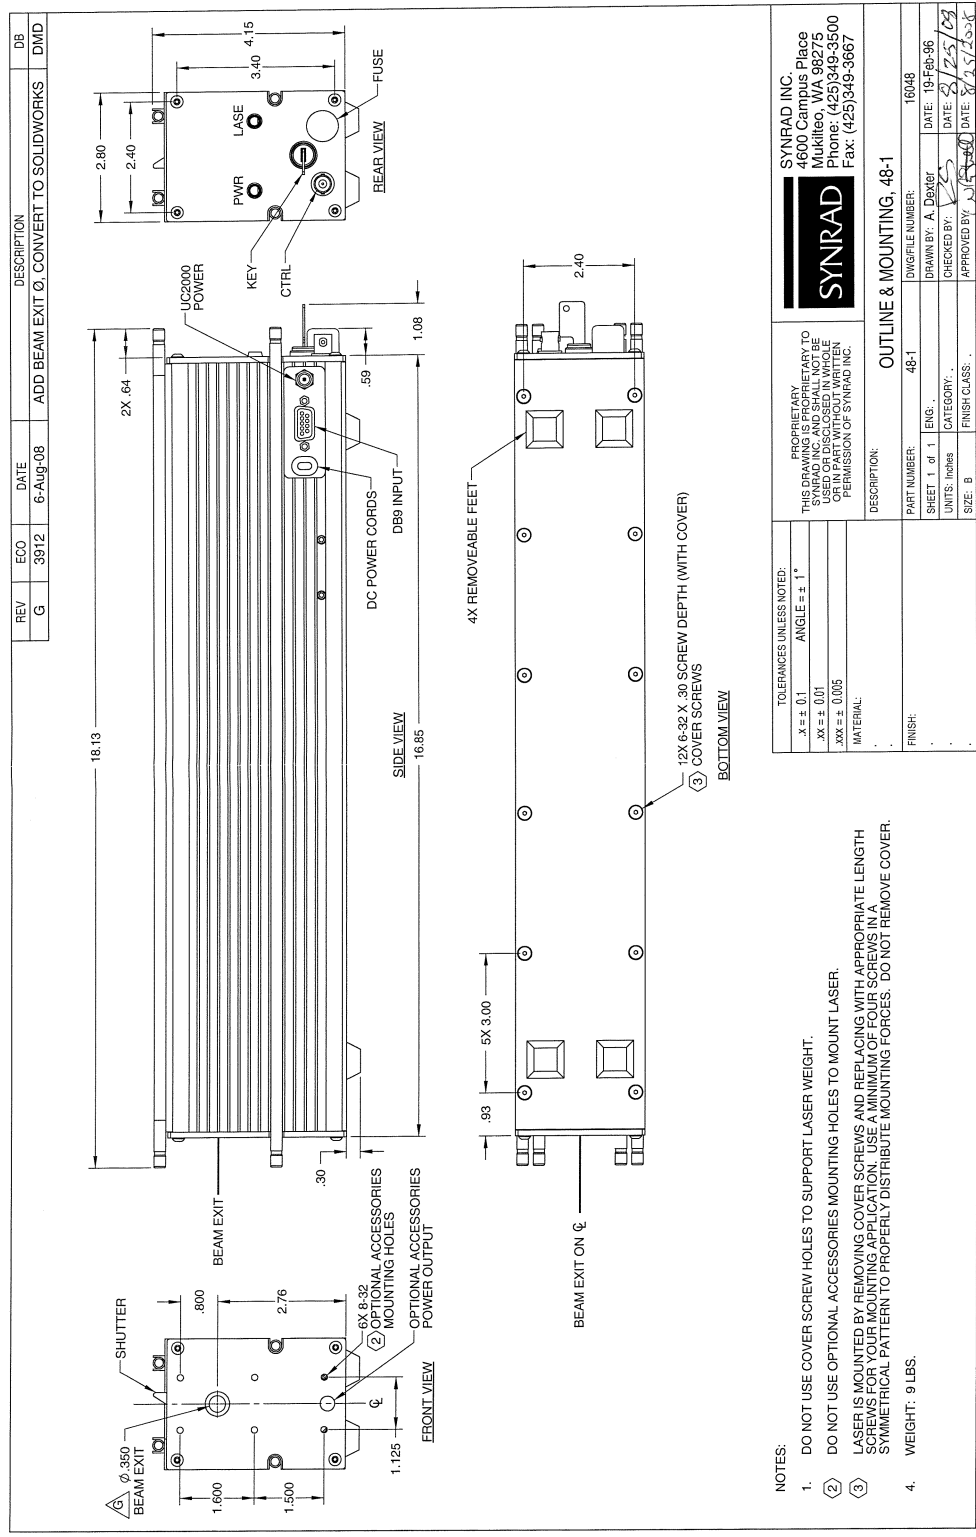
Model 48-1 package outline and mounting dimensions, 1 of 2.
